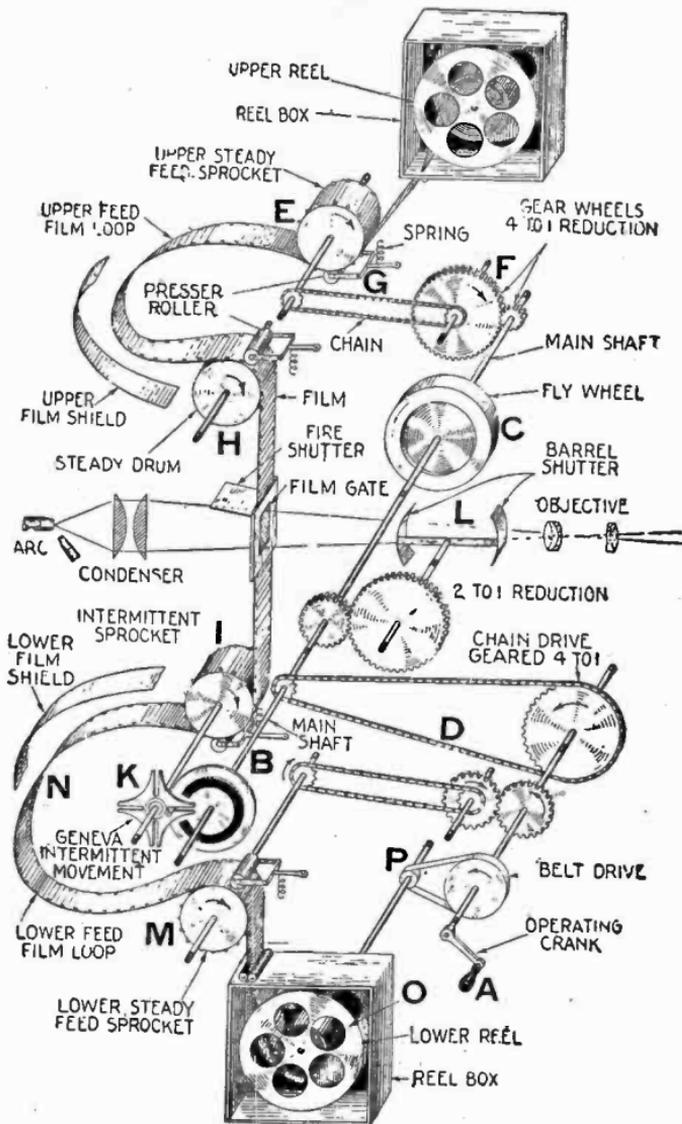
,700.—Elementary moving picture machine without case showing essential parts arranged to illustrate plainly the motion system.
